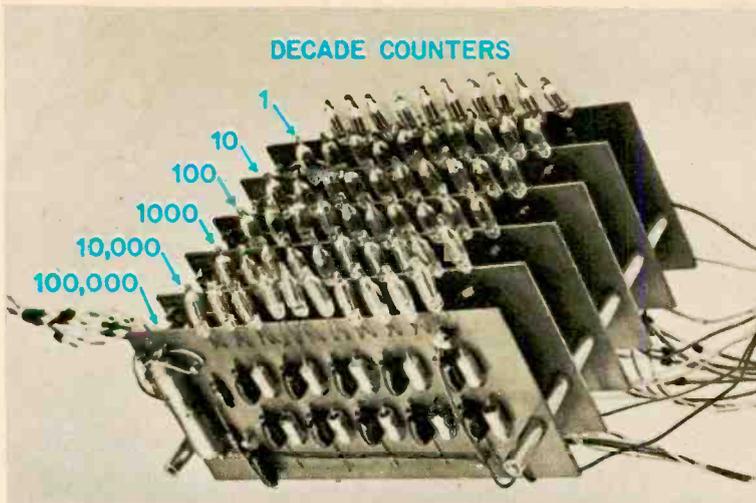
Decade counters. Author used printed-circuit boards instead of perforated board and flea clips. After all neon lamps are installed, join boards with 1/2-in.-long spacers at ends. Entire assembly is held to side of cabinet with spacers which appear at bottom of the photo.
